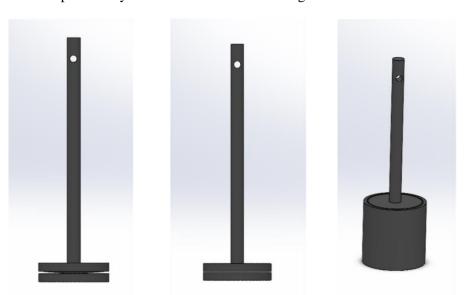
The three measuring components. From left to right, the bob and cup mechanism, the parallel plates mechanism, the cone and plate mechanism. 0.5mm gaps were used between two parts in each assembly.
